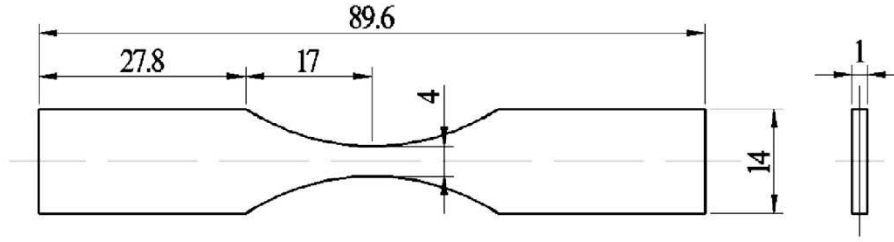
Dimensions of the ultrasonic fatigue test specimen (mm).
